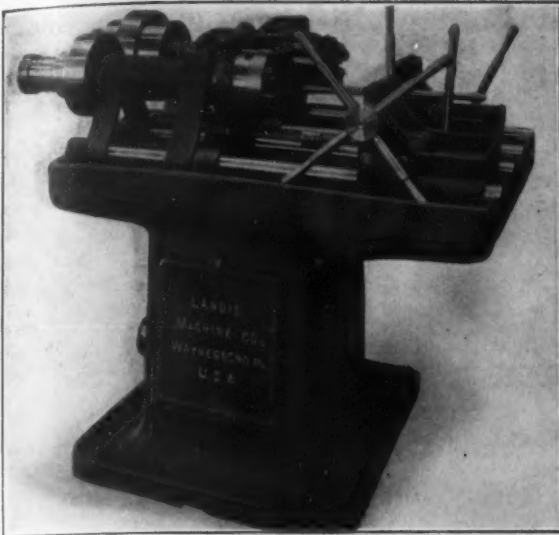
The 1/2-In. Double Head Bolt Cutter.
